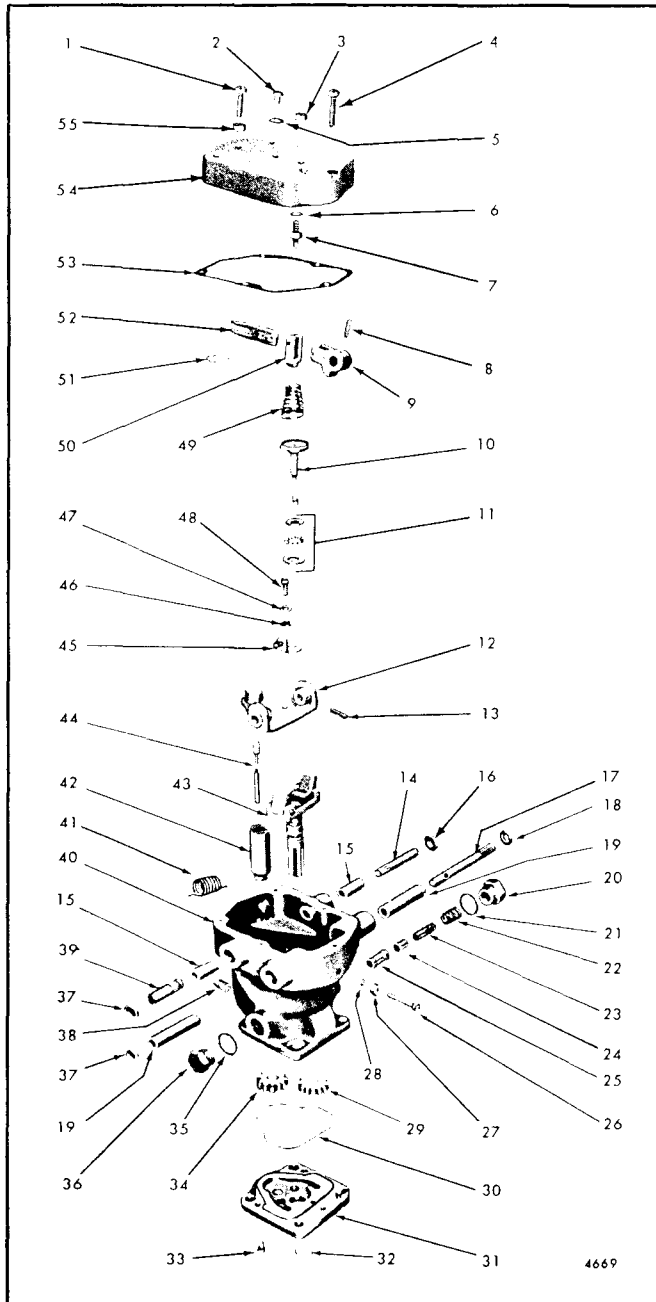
Hydraulic Governor Details and Relative Location of Parts (Current)
